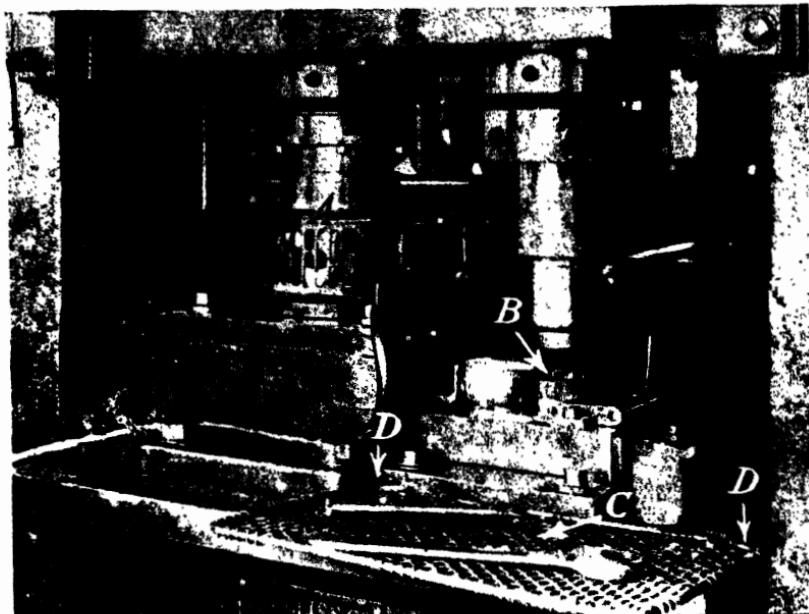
Transfer blanking and drawing dies. (*Courtesy of the E. W. Bliss Company.*)
